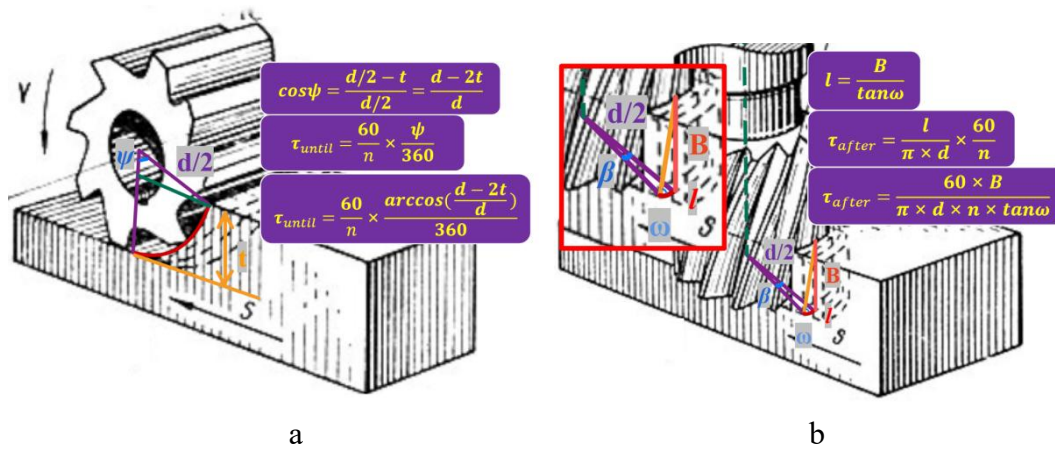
Scheme for calculating the contact time of the cutter tooth with the workpiece
